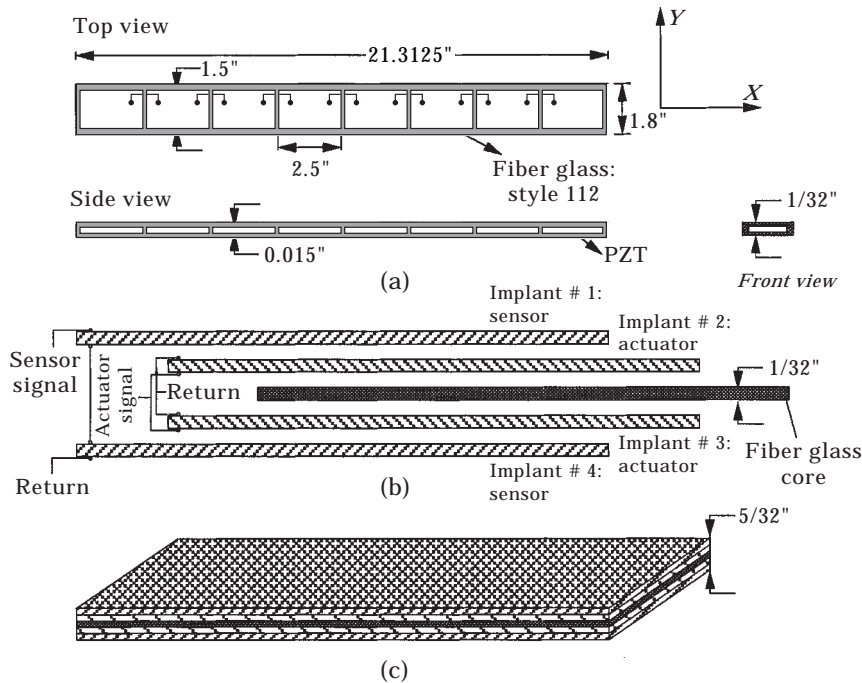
Beam construction: (a) PZT implant layout, (b) implant configuration, (c) implant assembled into beam.
